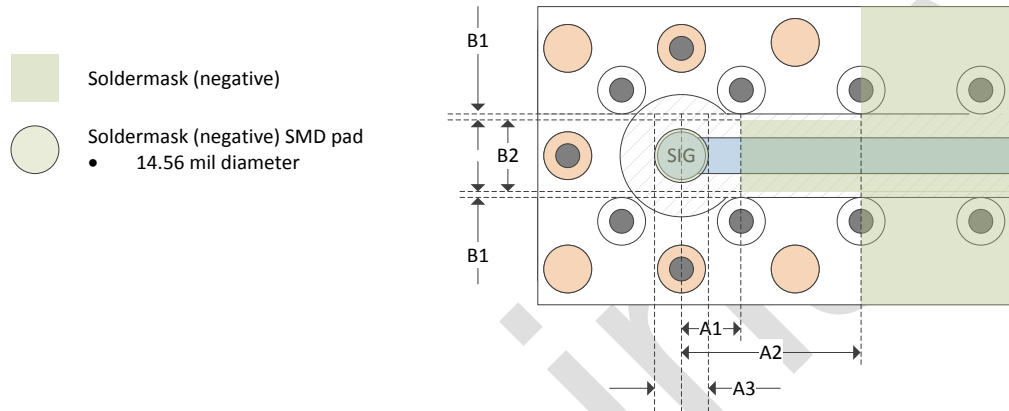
IWR1642 RO4835 LoPro BGA to PCB Transition and GCPW Dimensions (Drawing Not to Scale)
